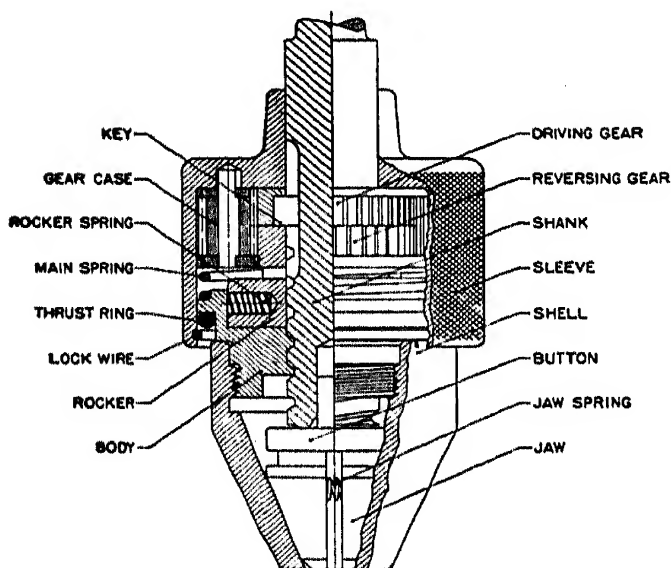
A sectional view of a drill chuck. (Courtesy Wahlstrom Tool Div., American Machine and Foundry Co.)
